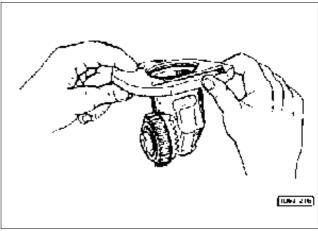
ONLY FOR TRAKTORS WITH ELECTRONIC GOVERNOR ONLY - Assemble the square transmission controlling both engine governor and oil pump. As to assembly and adjustment procedures see instructions on page 62;
